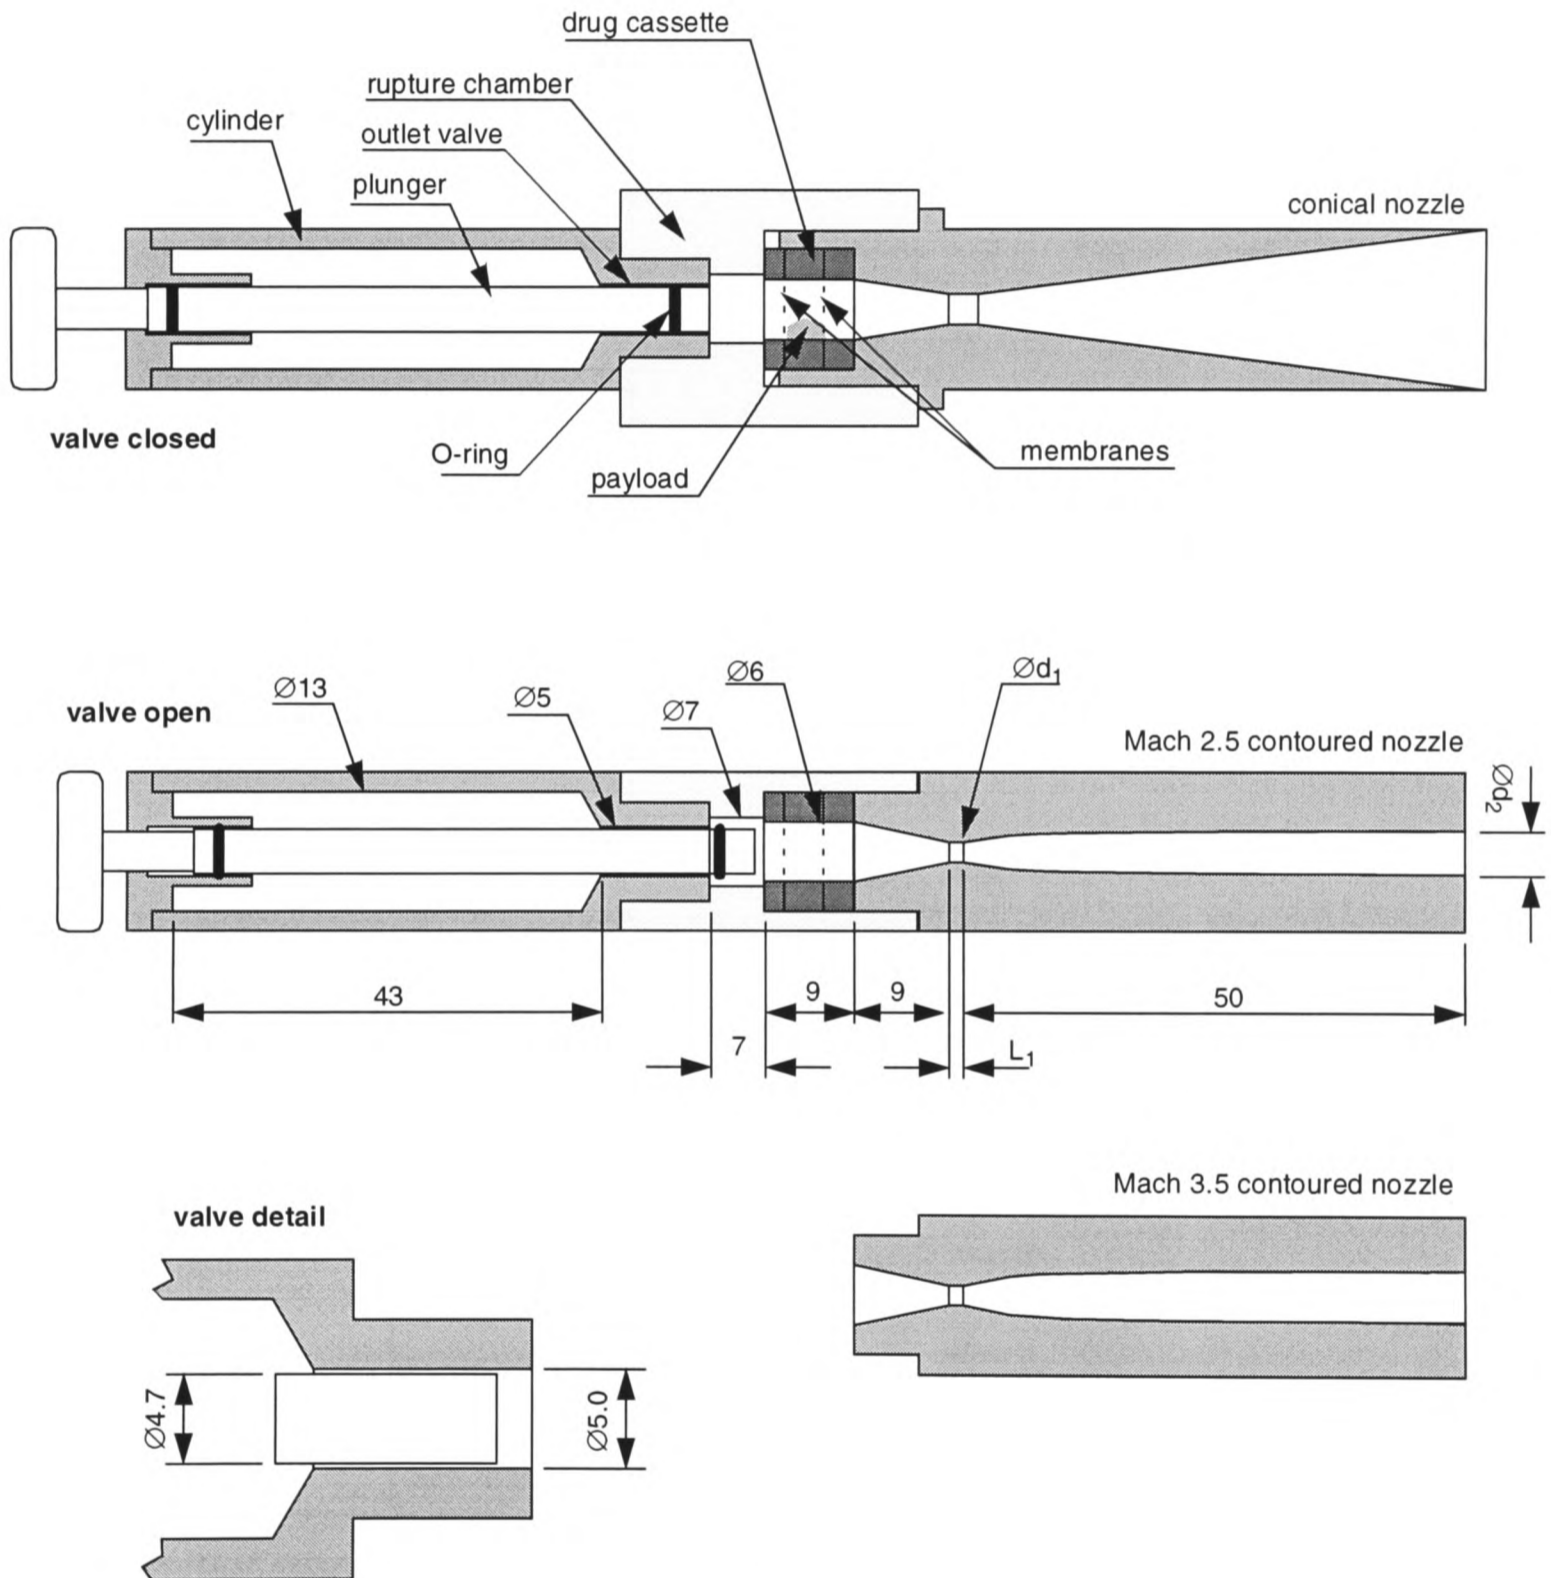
Geometry of the test devices with dimensions in mm. The dimensions L_1 , d_1 and d_2 are specified in Table 2.1.
